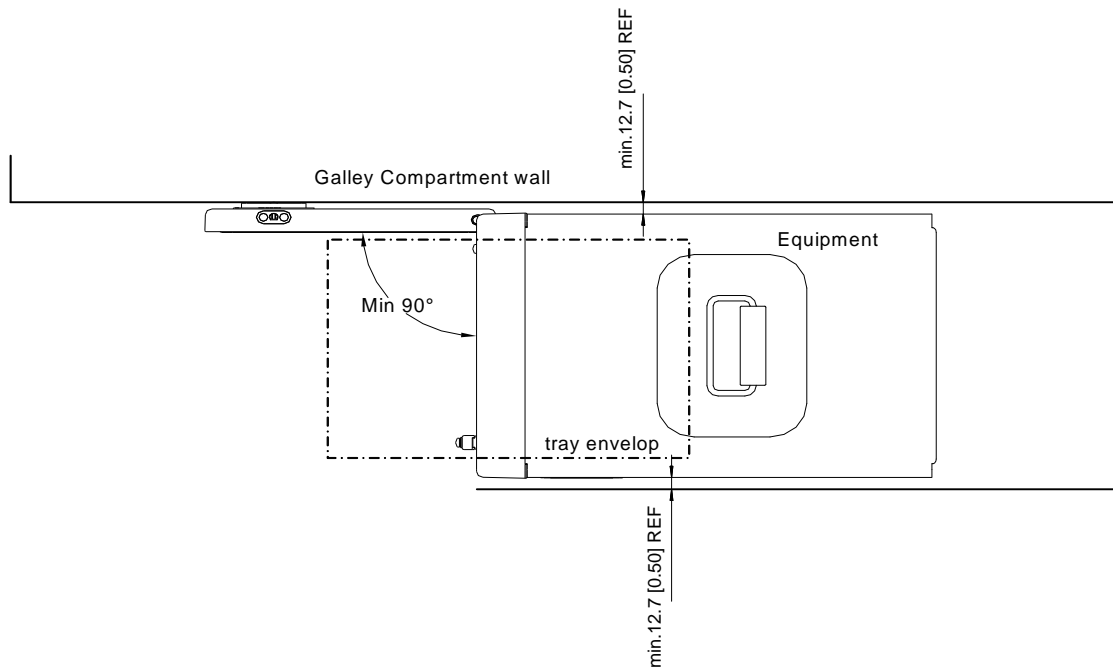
D – Size 5 Top View including Door Opening Envelope
